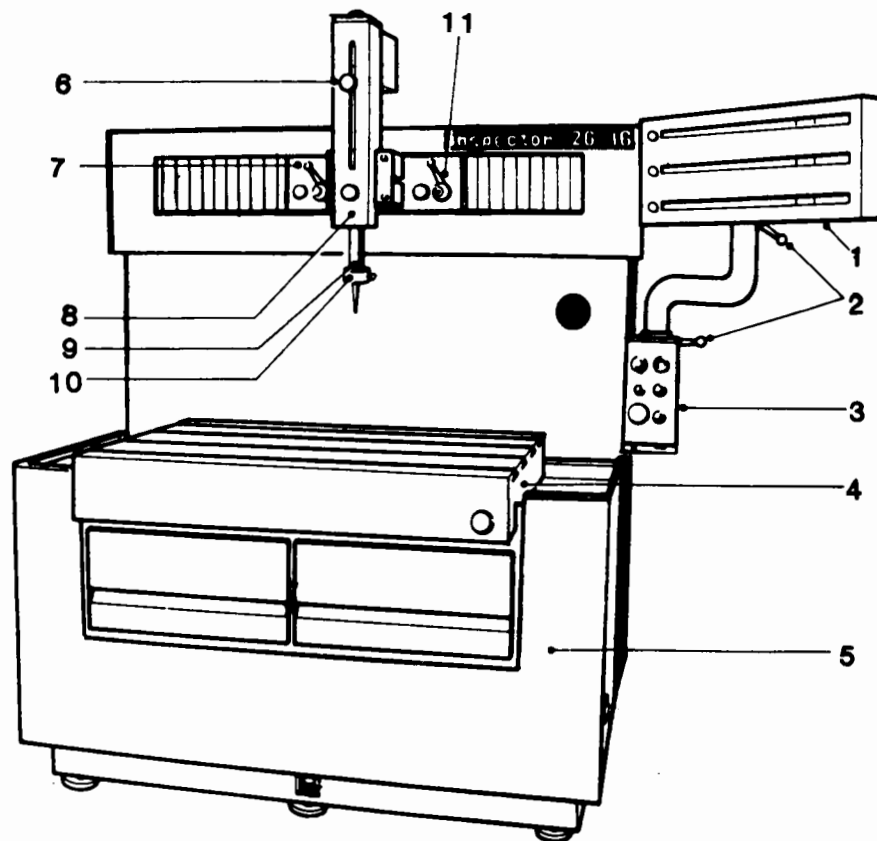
The Olivetti Inspector machine used for palatal measurements.
